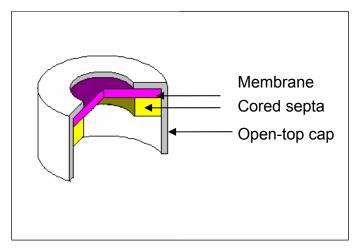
Schematic representing a cutaway of the capmembrane assembly showing an open-top cap, membrane, and cored septa.
